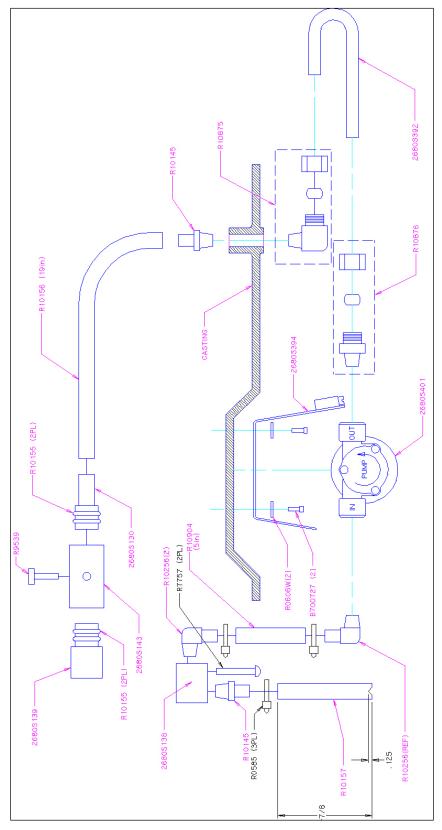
Exploded View of Pump Assembly Diagram (2780S804)
